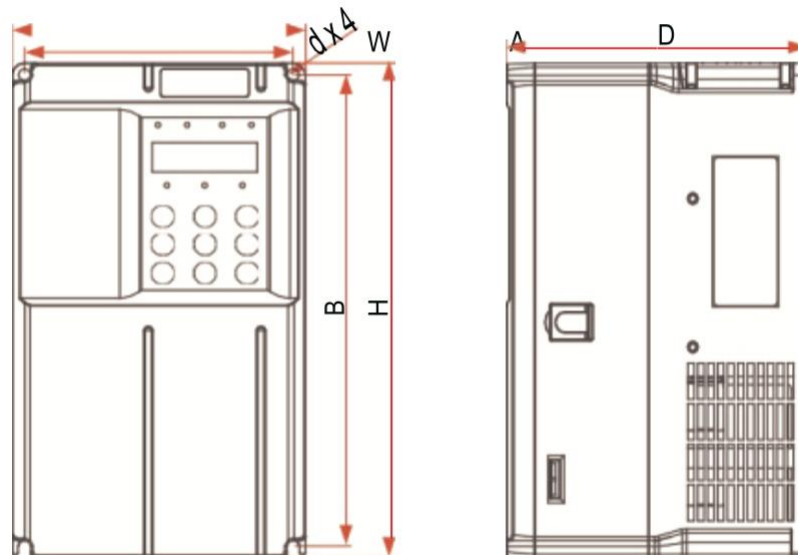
TK500-T0007 G3 ~ TK500-T0150 G3 External dimensions and mounting dimensions
